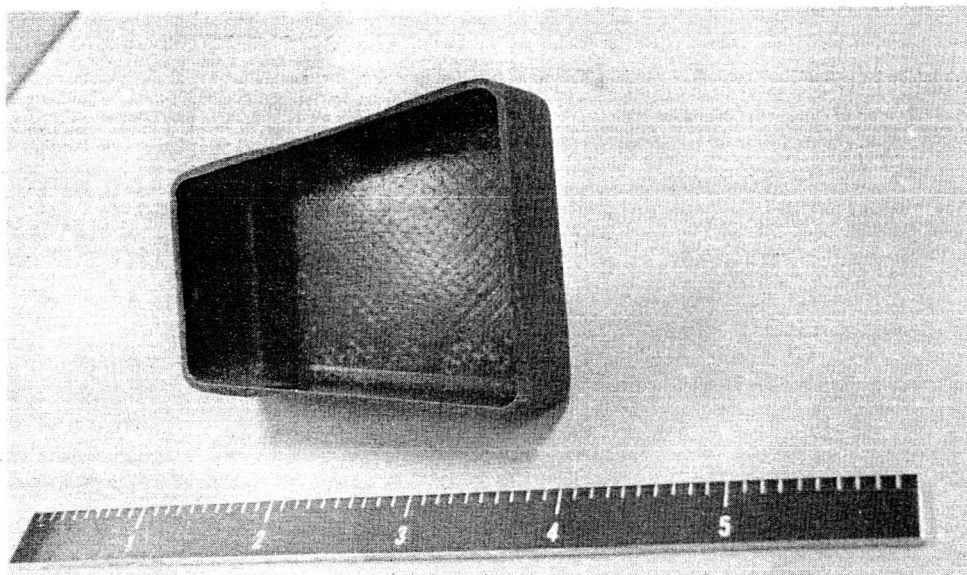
Manufacturing Verification Hardware (Test No. 16) Showing Completed Rear-Spar Header
